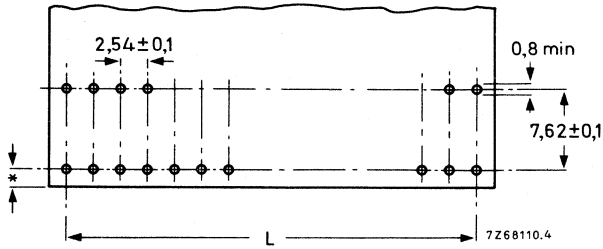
Hole pattern for board edge sockets. See Table 1, pages 8 and 9 for dimension L. The dimension marked * is determined by customer application (min. 2 mm).
